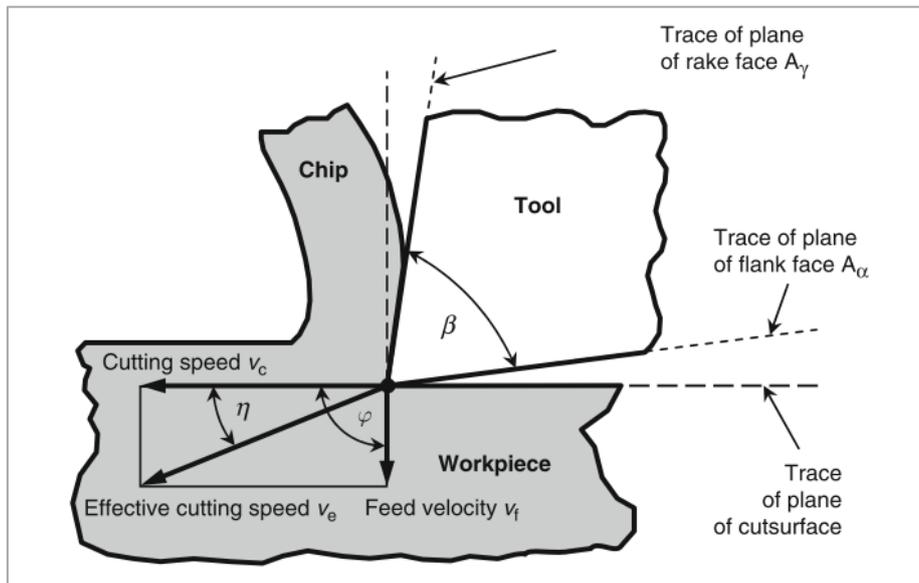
Mechanics of chip formation at the cutting edge of the tool (Adapted from [25])
